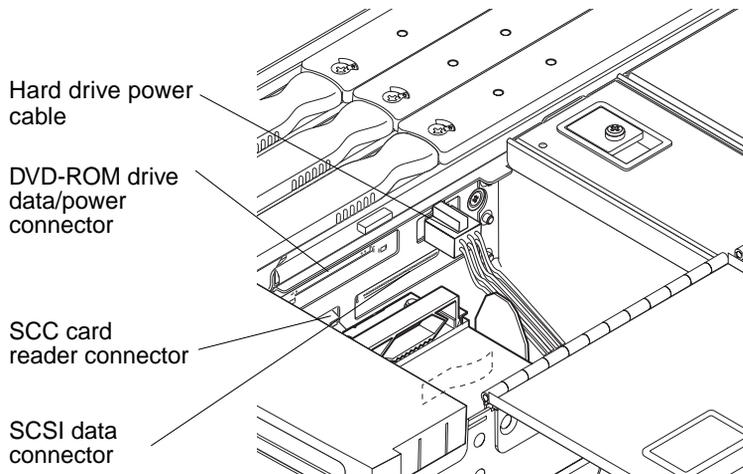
IB_SSC Assembly Cable and Connector Locations
